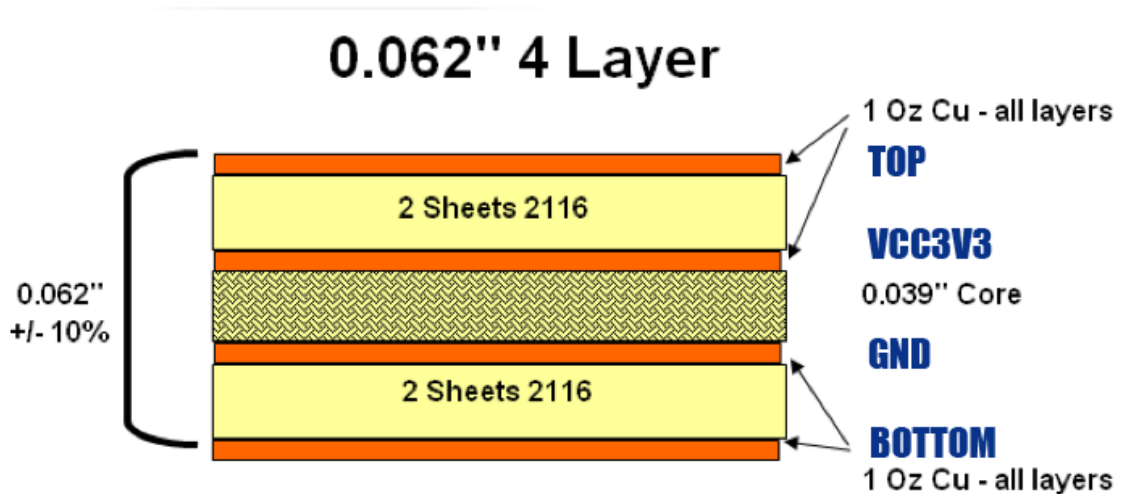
0.062" 4-Layer PCB Stack-Up
